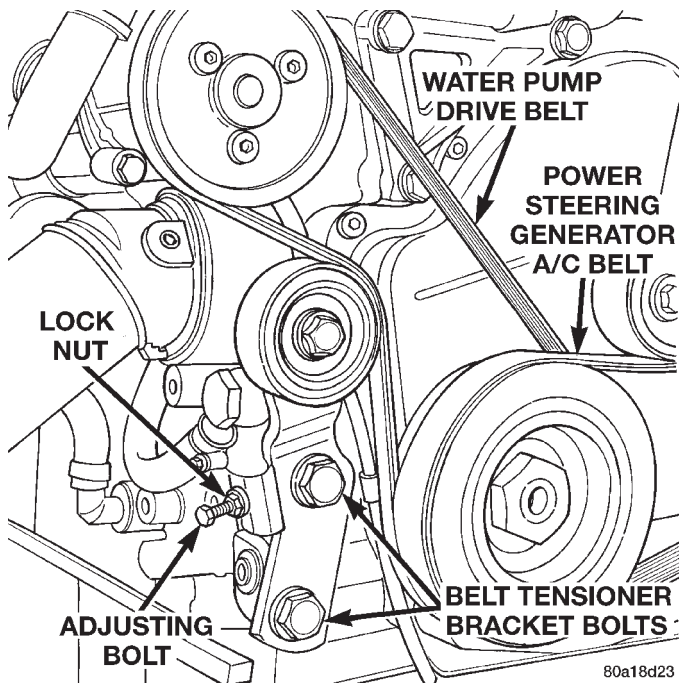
Water Pump Drive Belt— 2.5 L VM Diesel
